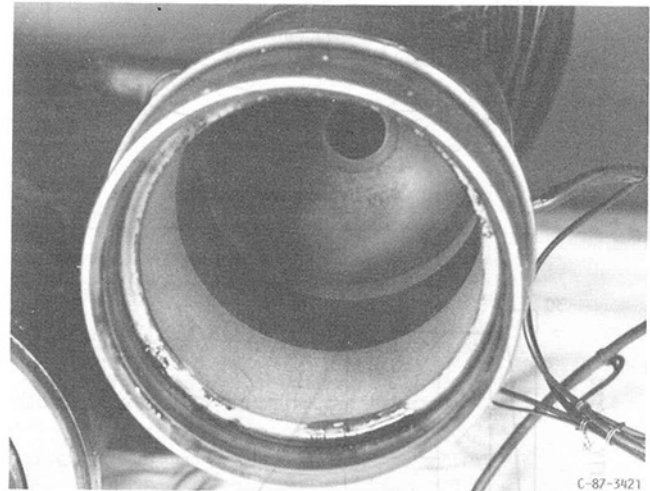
PS200 coating on Stirling engine cylinder after 22-h engine test with "hot rings"
